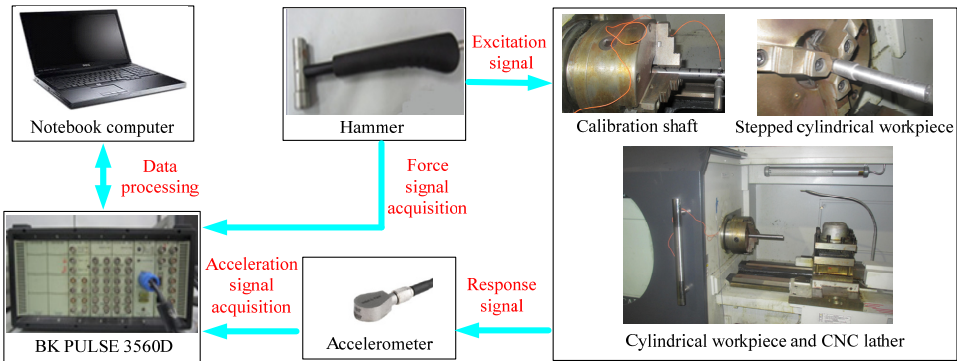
Schematic of FRF measurement system of cylindrical workpiece of CNC lathe
